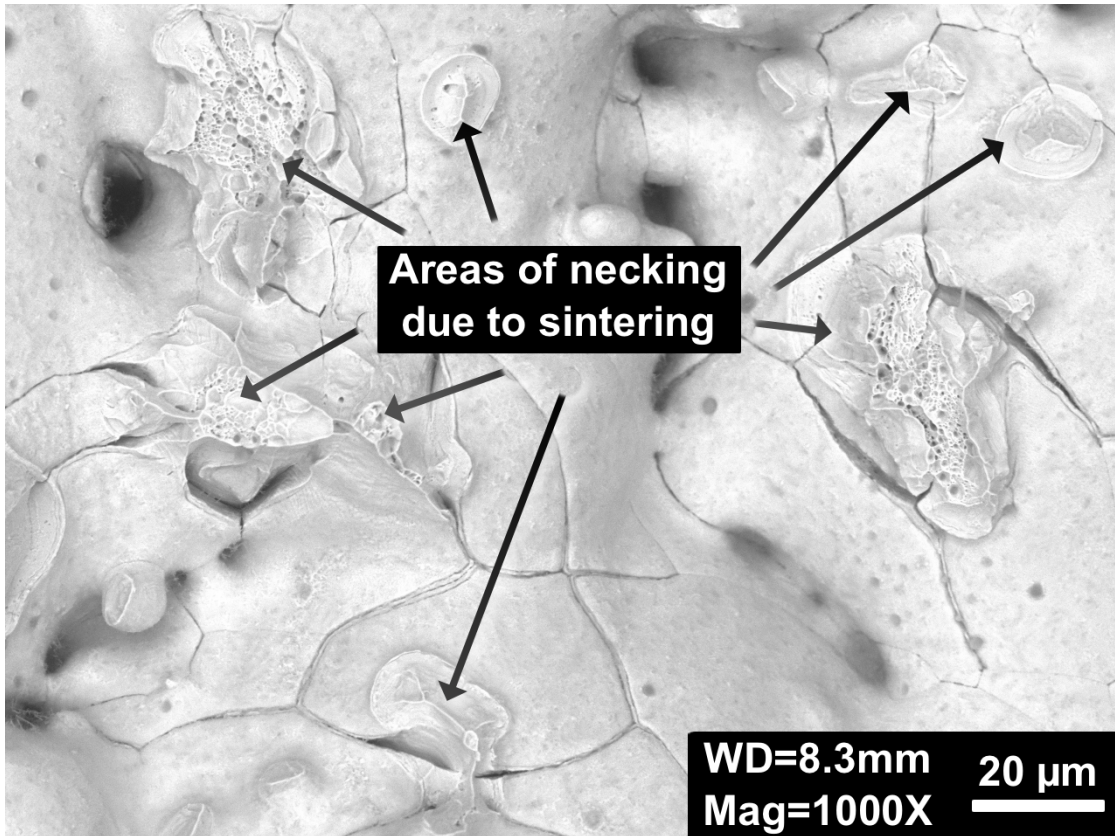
Areas on the fracture surface where localised necking of particles and weld tracks occurred but were broken off.
